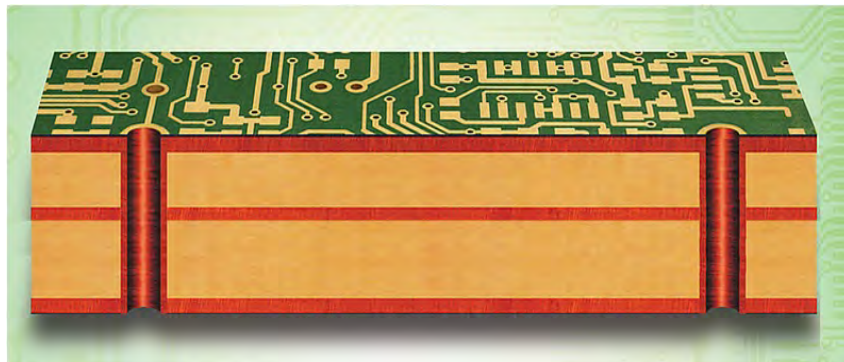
PCB layers used for Evaluation Boards in Starter kit
